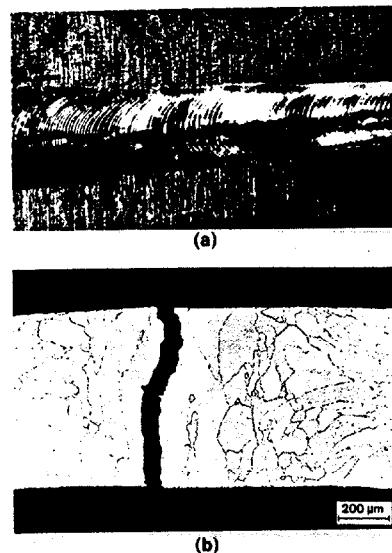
Autogenous bead-on-plate Gas Tungsten Arc Weld of Ir-O.3% W - 200 ppm Th. Welding Speed 21.5 mm/s. (a) Macrostructure (b) Transverse Microstructure
